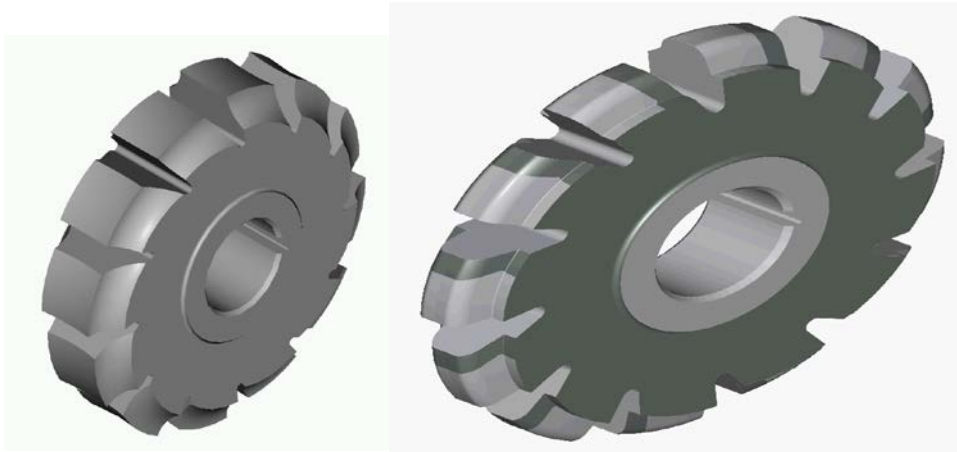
3D rendered milling cutters: central screw (left), idler screw (right).
